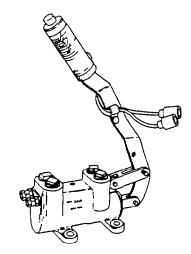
Location of major components, assemblies and auxiliaries (Sheet 4 of 7).
